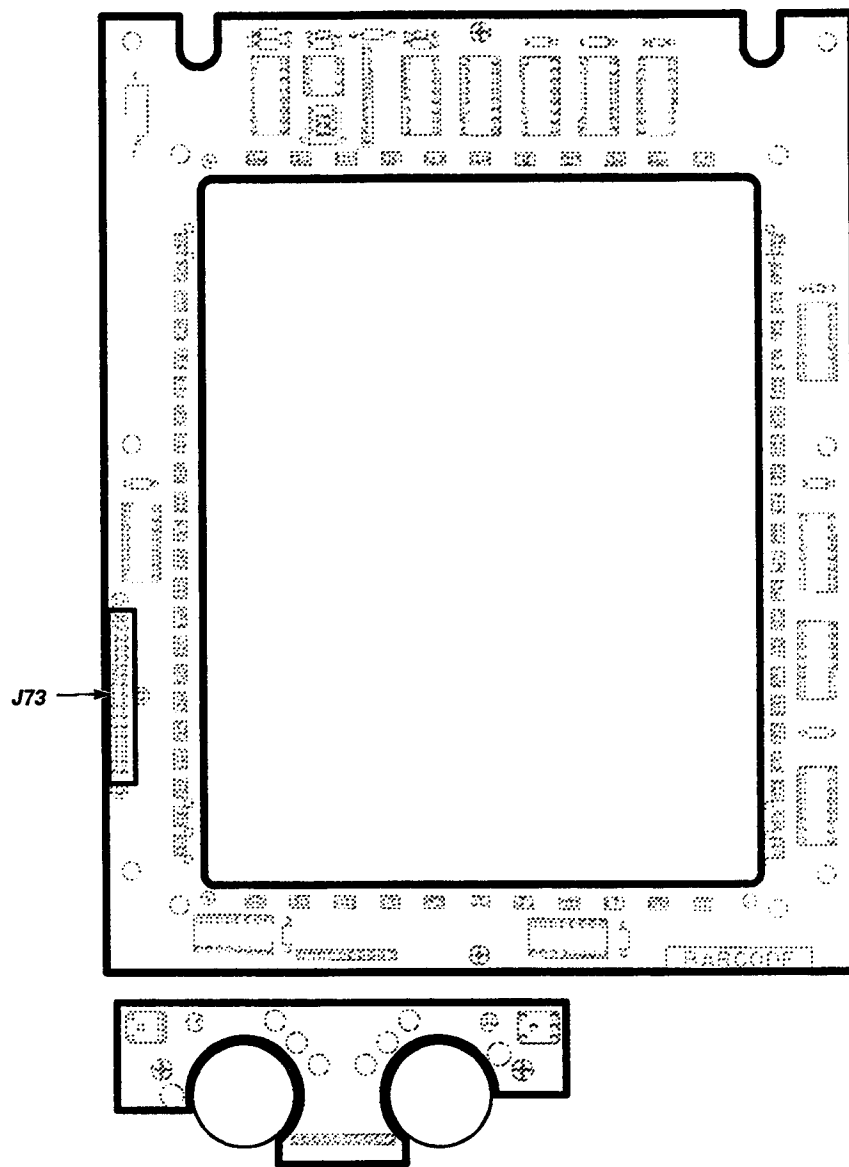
Removing/Replacing the A9 Touch Panel Assembly
